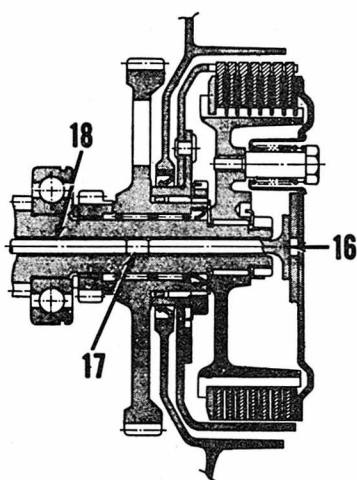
A—Cross section of early clutch. Push rod (16), 6X10MM dowel (17) and release rod (18) are the same on all models.
